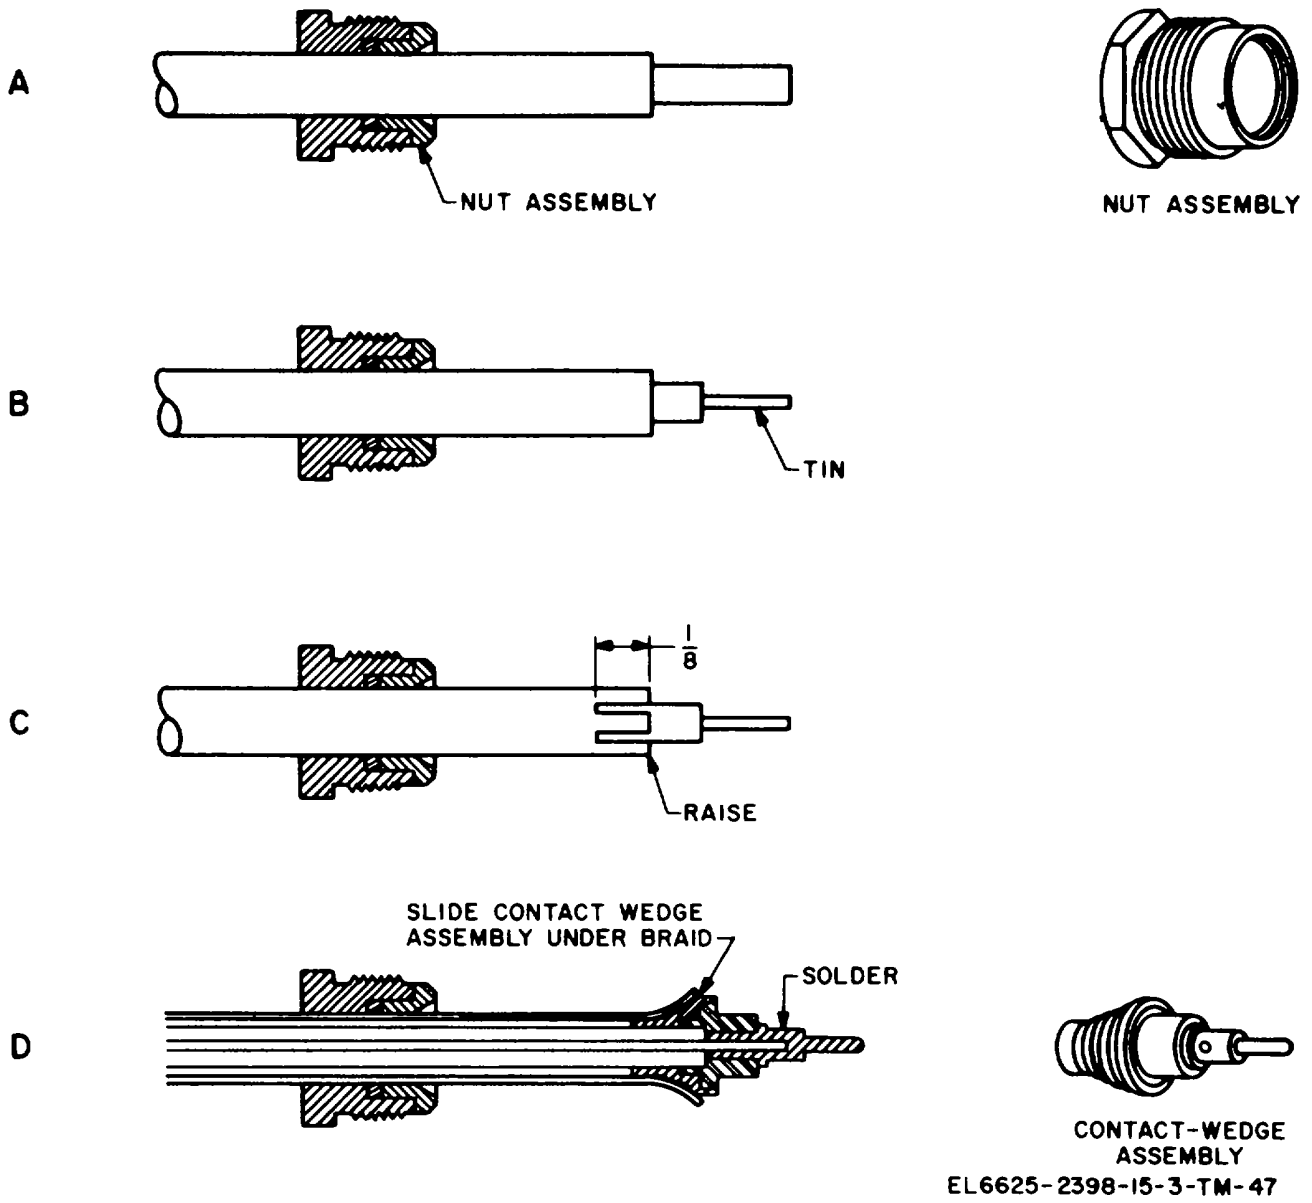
Assembly of connectors on hybrid attenuator cables.
